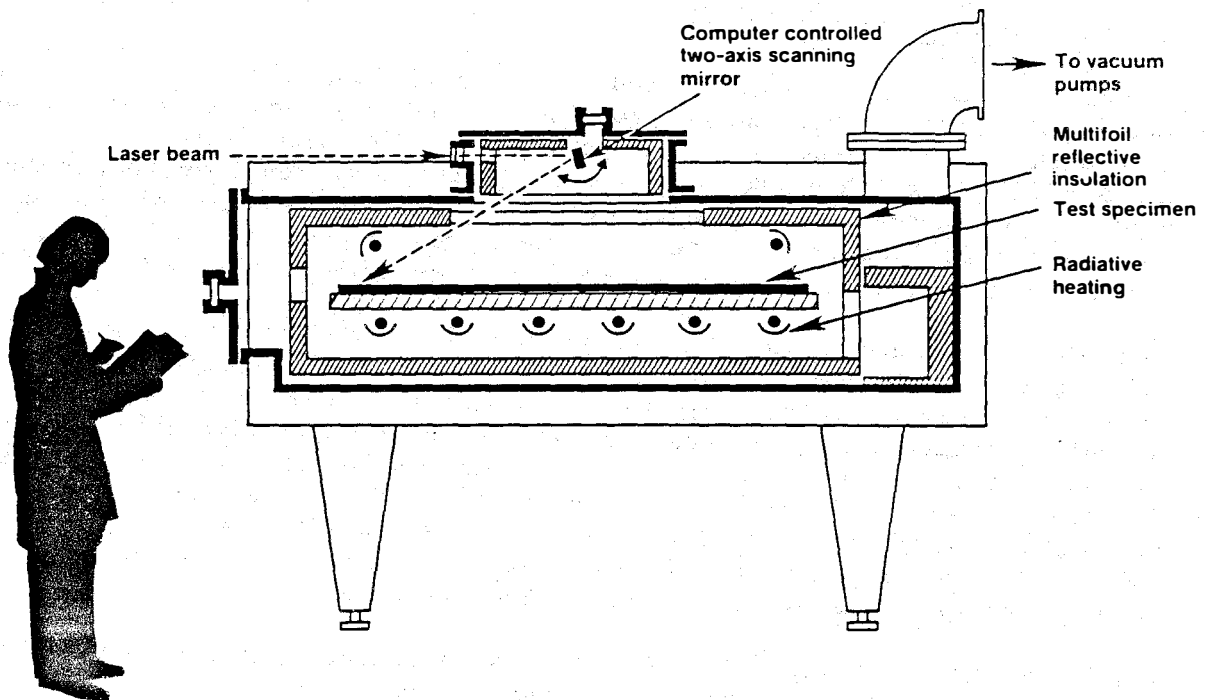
Cross-sectional diagram of the vacuum laser welding furnace
